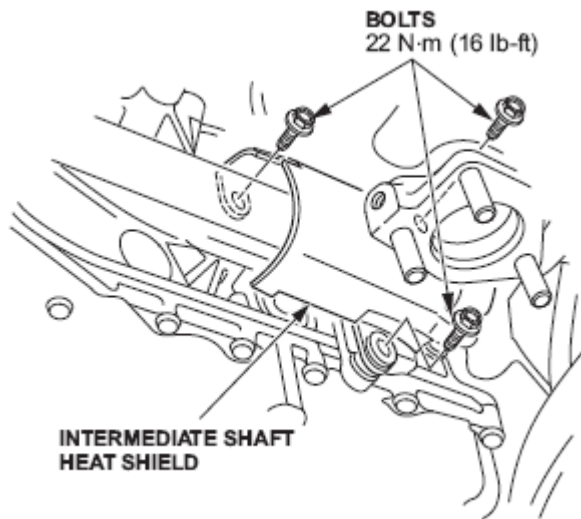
Identifying Intermediate Shaft Heat Shield Bolts & Torque Specifications
